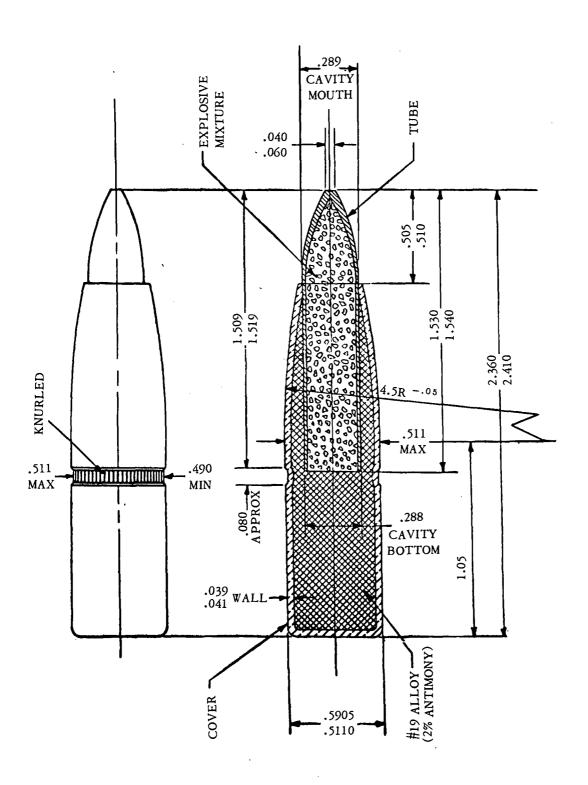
BULLET, EXPLOSIVE, CALIBER .50, T1
